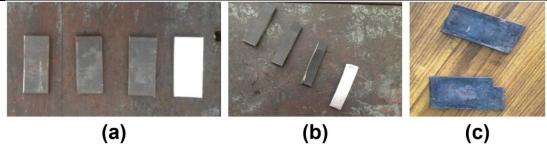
Test specimen, (a) Sample I; (b) Sample II; (c) Sample III.
